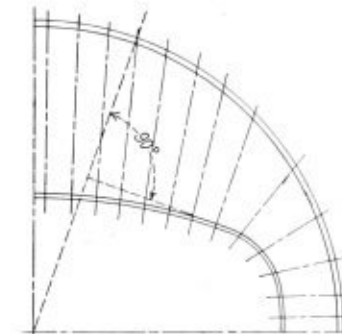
Staying for Wrapper Sheet of Locomotive Boiler
